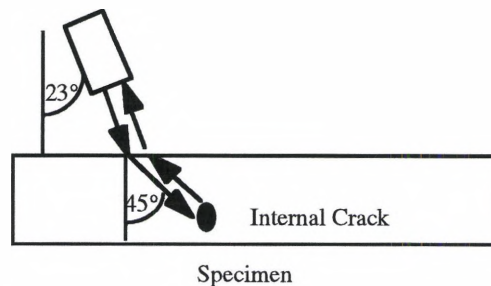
Backscatter shear wave immersion C-scan technique. Sound enters specimen at 45° angle, and reflects off internal cracks.
